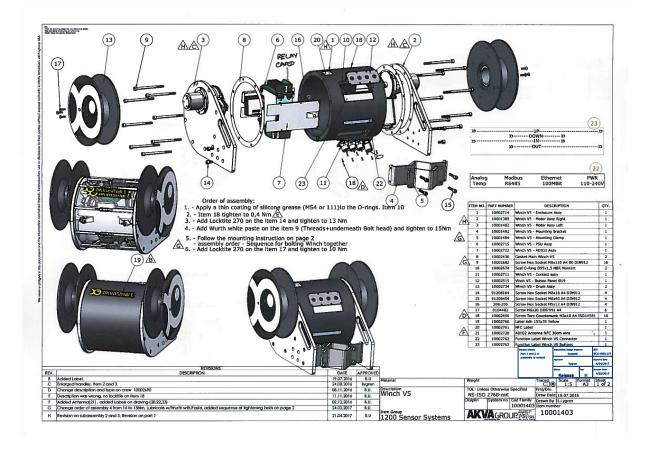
Winch Assembly (parts breakdown)¹⁴
